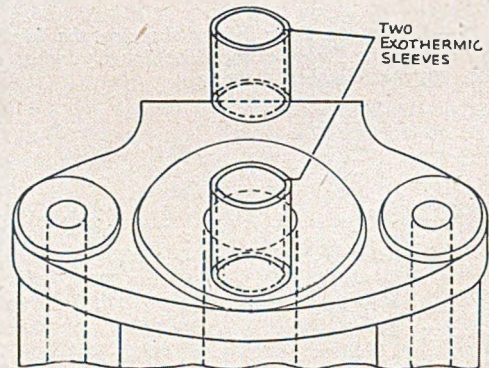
Second Method used for Feeding the Tube-testing Cylinder, which weighed 7 cwt. The Casting again exhibited Porosity in the Bore.
